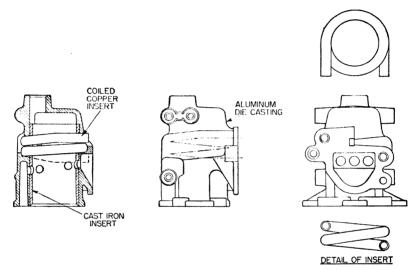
Design of the die for this aluminum cylinder for an outboard boat motor is simplified by use of a coiled copper insert. The insert forms a circular cooling passage that would be impossible to core.
